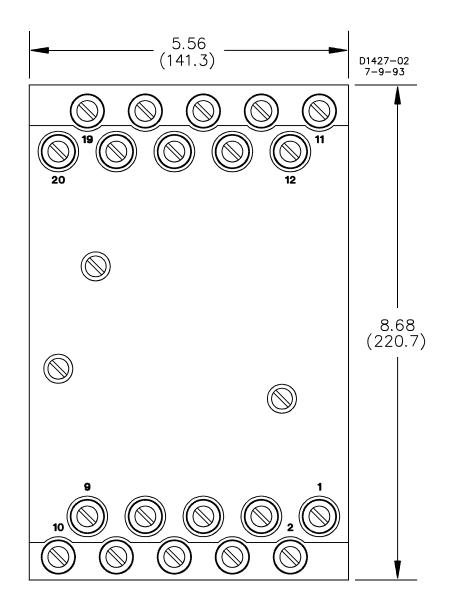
S1 Case, Double-Ended, Projection Mount, Outline Dimensions, Rear View
